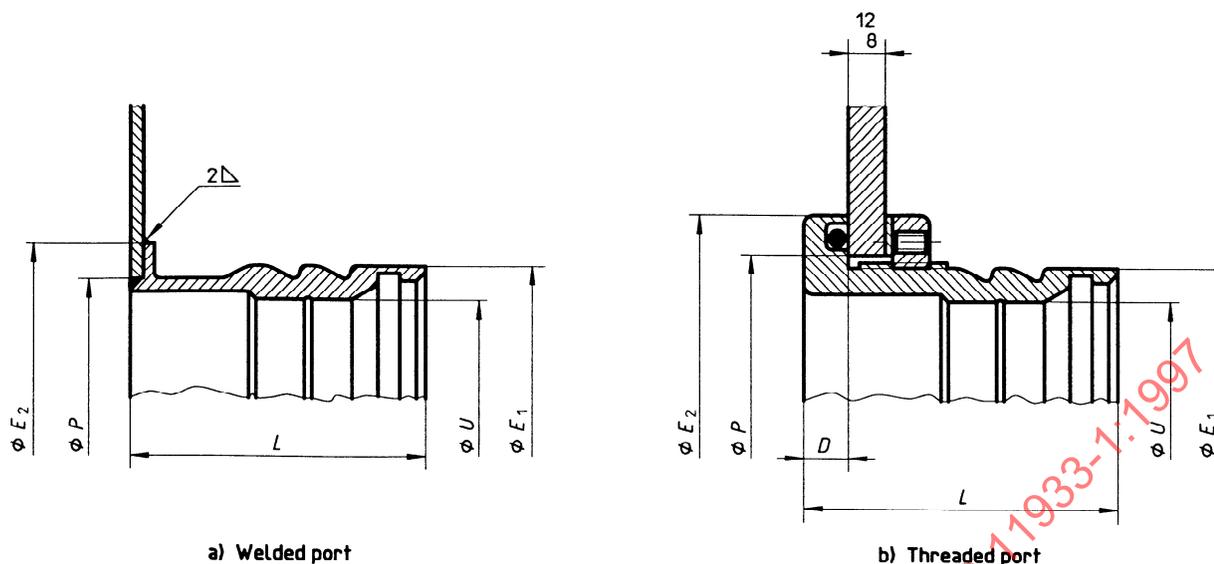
Example and dimensions of glove/bag port which can accept two types of gloves/bags either directly on external grooves or with an ejectable support ring
